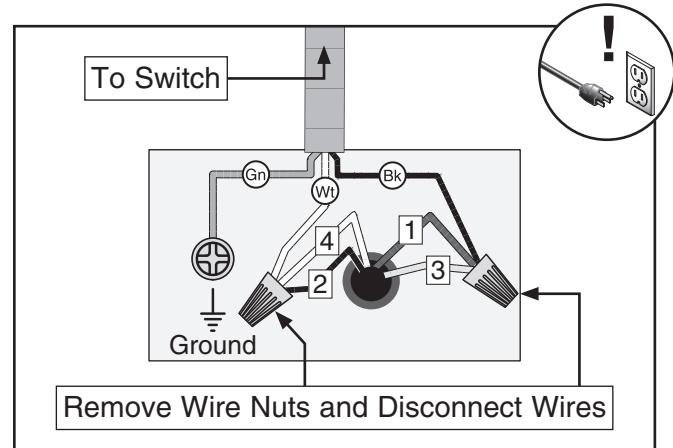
Inside motor junction box (motor pre-wired to 120V).
